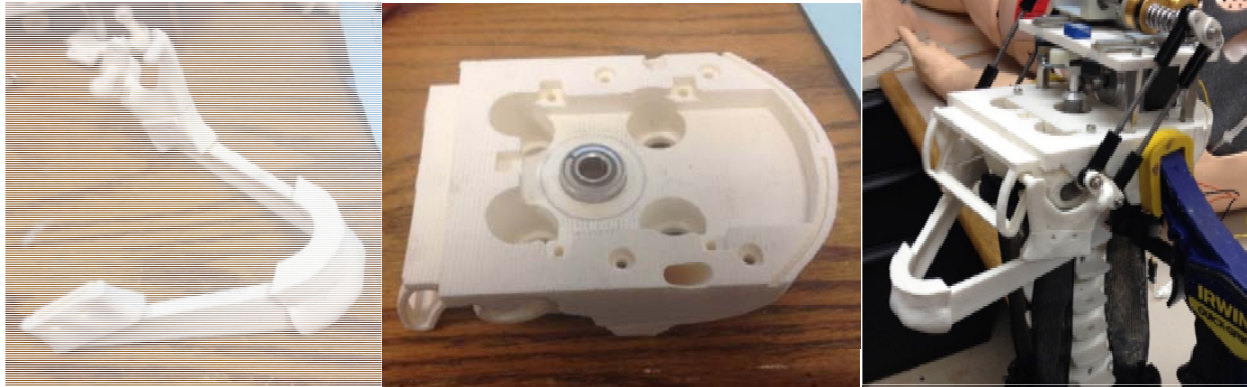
Test assembly of jaw (omitting fracture elements), head base with air muscle mounting sites and flexible shaft seat, full mechanism mounted for testing.
